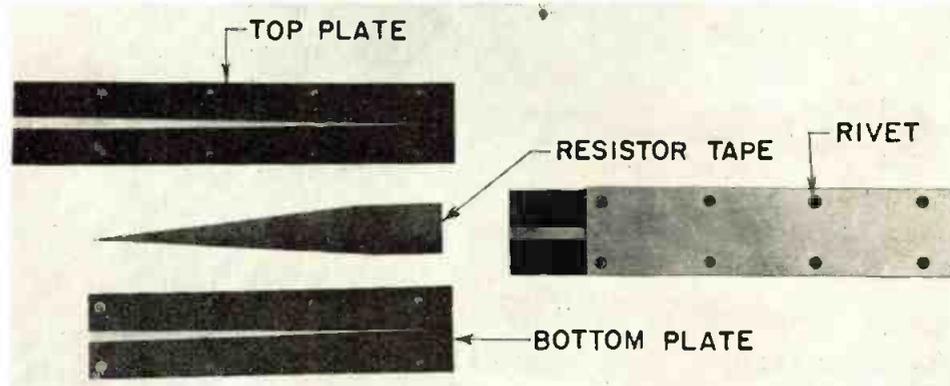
Matched load in tri-plate line unassembled (l) and assembled (r)
